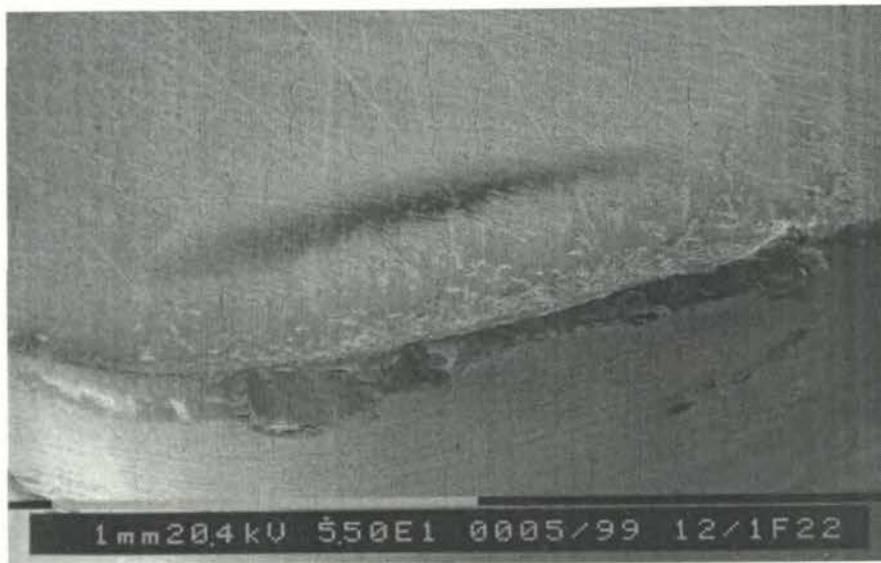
38 A general view of KMF tool failed due to progressive chipping and workpiece adhesion after cutting Inconel 718 for 22 minutes at 25 m/min and 0.14 mm/tooth
